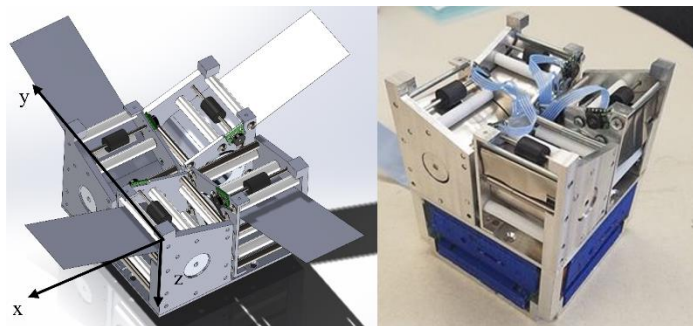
Drag Maneuvering Device (DMD) CAD model and prototype.
